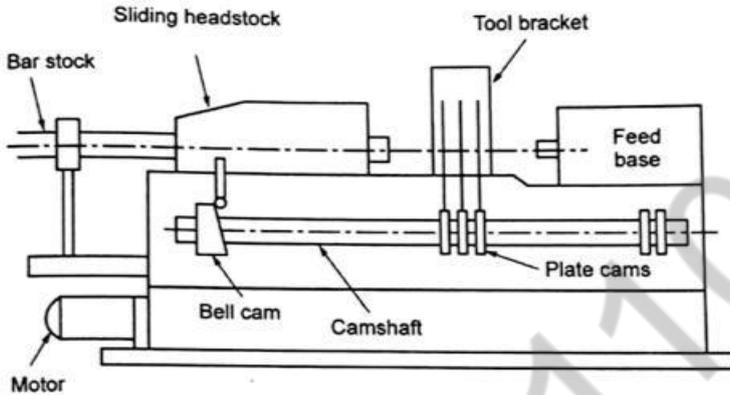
Swiss type screw type screw cutting machine It consists of four major parts.
